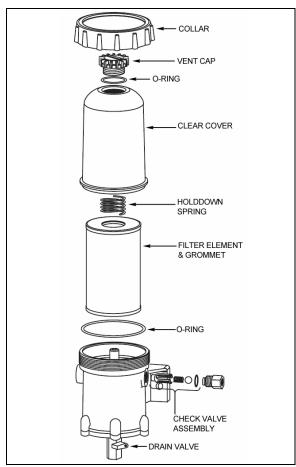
DAVCO FUEL PRO 382 EXPLODED VIEW 03034
